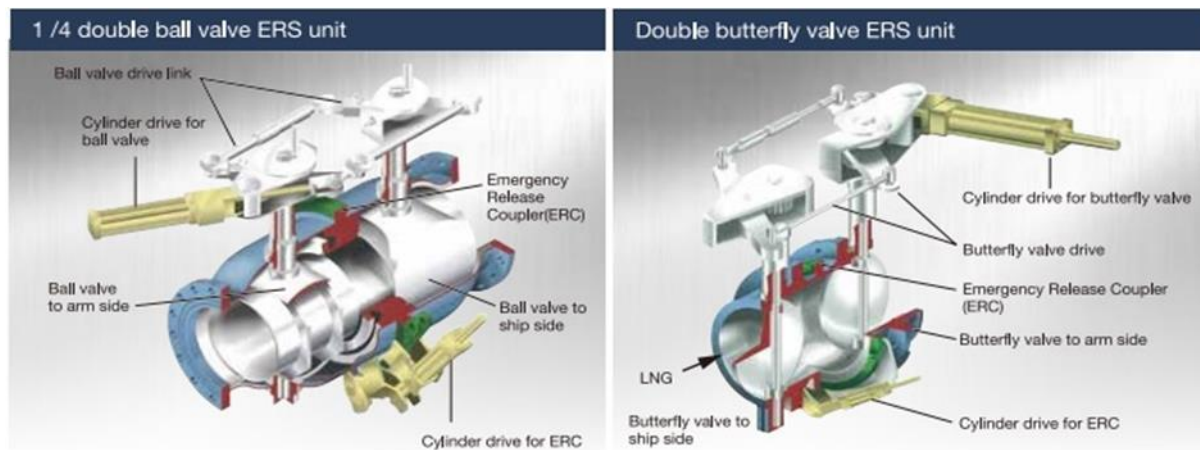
Design solutions for ERS left-to-right; double ball valve and butterfly valve [14].
